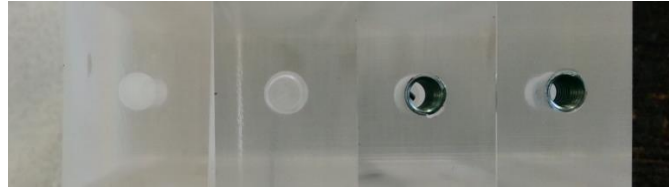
Steps for mounting the Helicoils® (A.O.P.)
